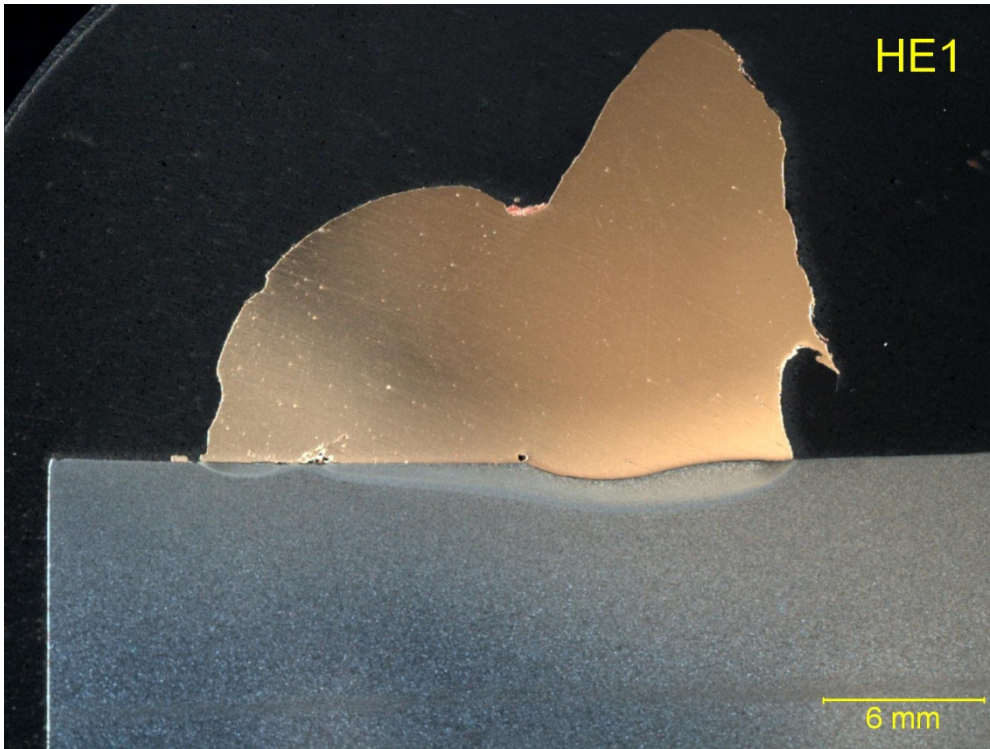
CAD Weld Joint Hyper-Eutectoid Rail #1
